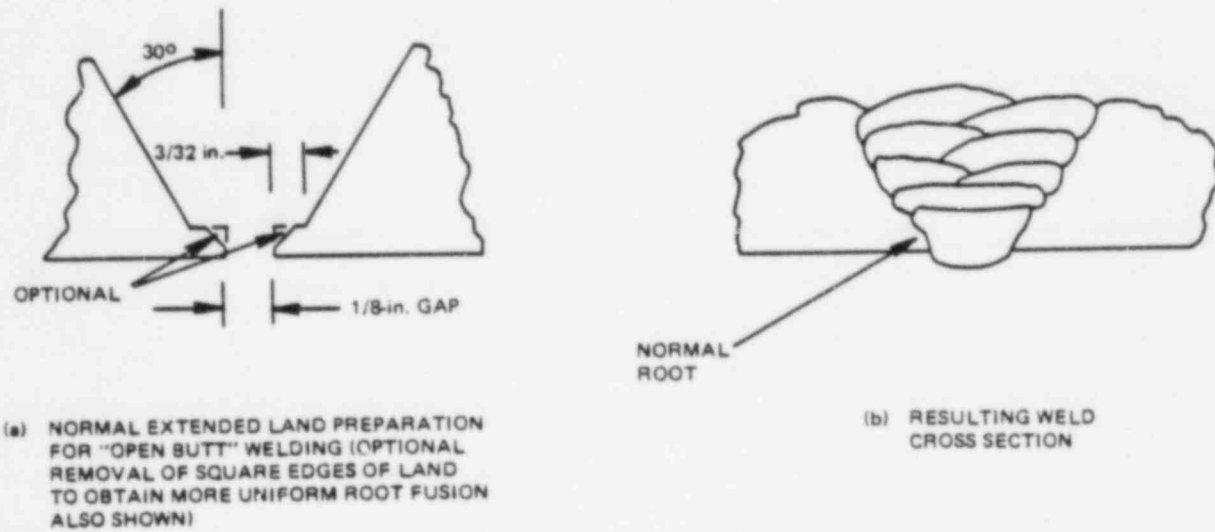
Normal Weld Preparation and Weld Cross-Section
